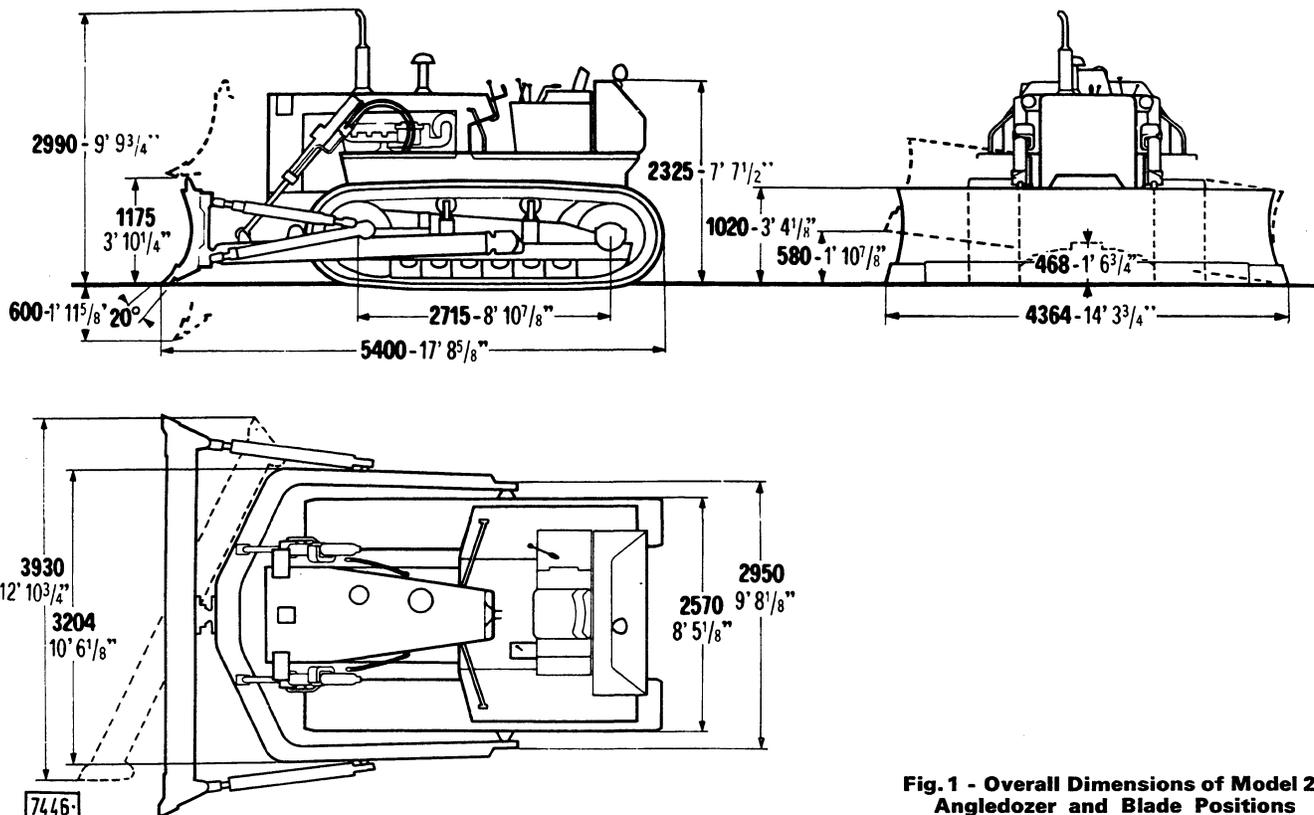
Overall Dimensions of Model 20 Angledozer and Blade Positions
